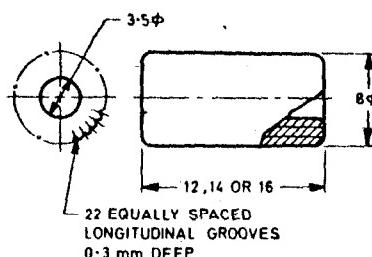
A TYPICAL SOLID RING WITH CHAMFER
